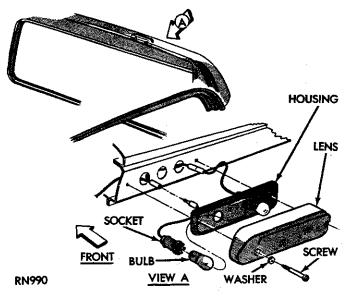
Cargo Lamp—Club Cab (3) To install, reverse the procedures.
